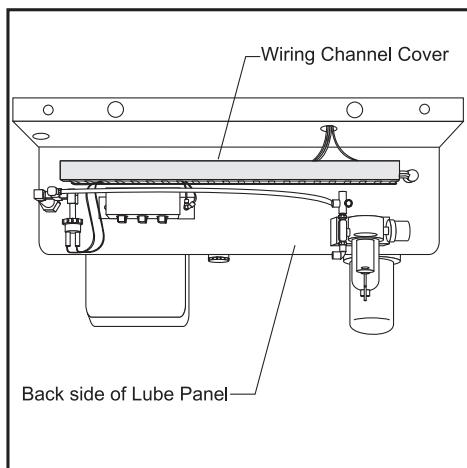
Top view of spindle lube/air solenoid assembly.
